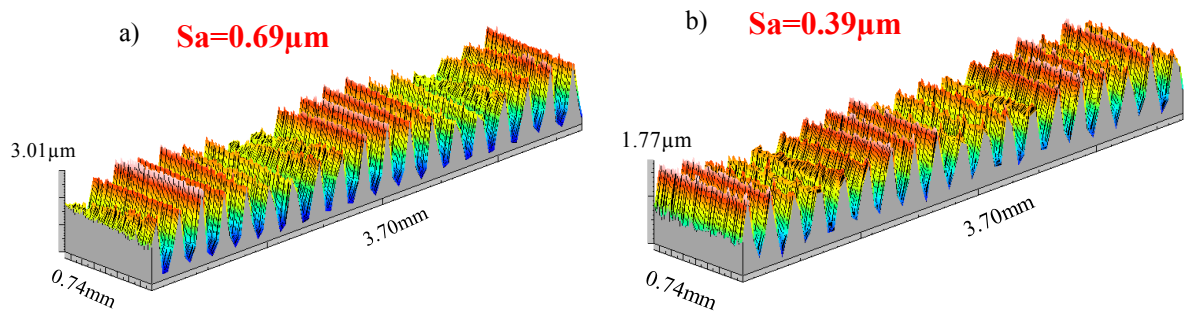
Workpiece surface topography produced with (a) new and (b) worn tools in Test 4
